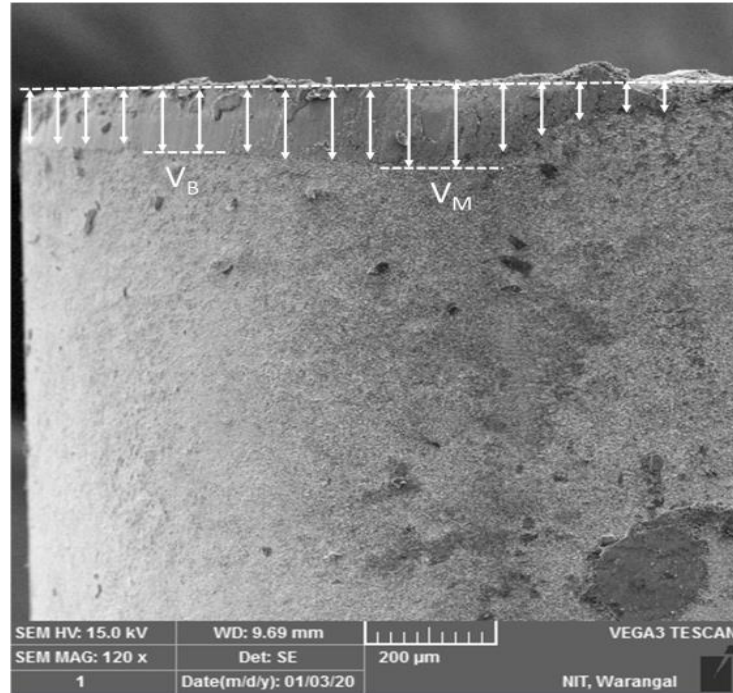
Flank wear measurement from the cutting edge of the tool
